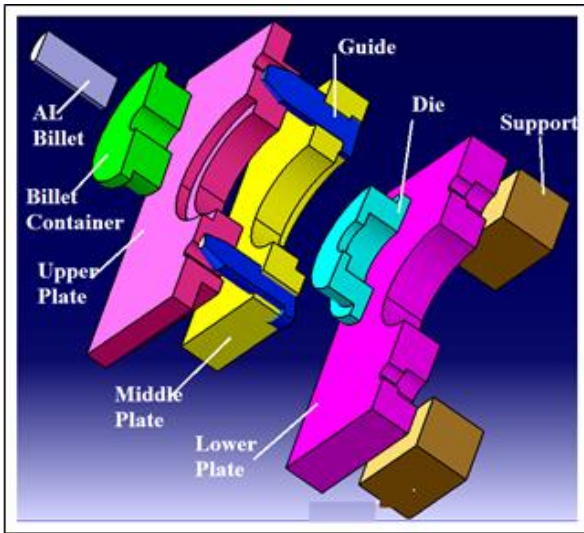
Cross Sectional View of the Mould in 3D Form.
